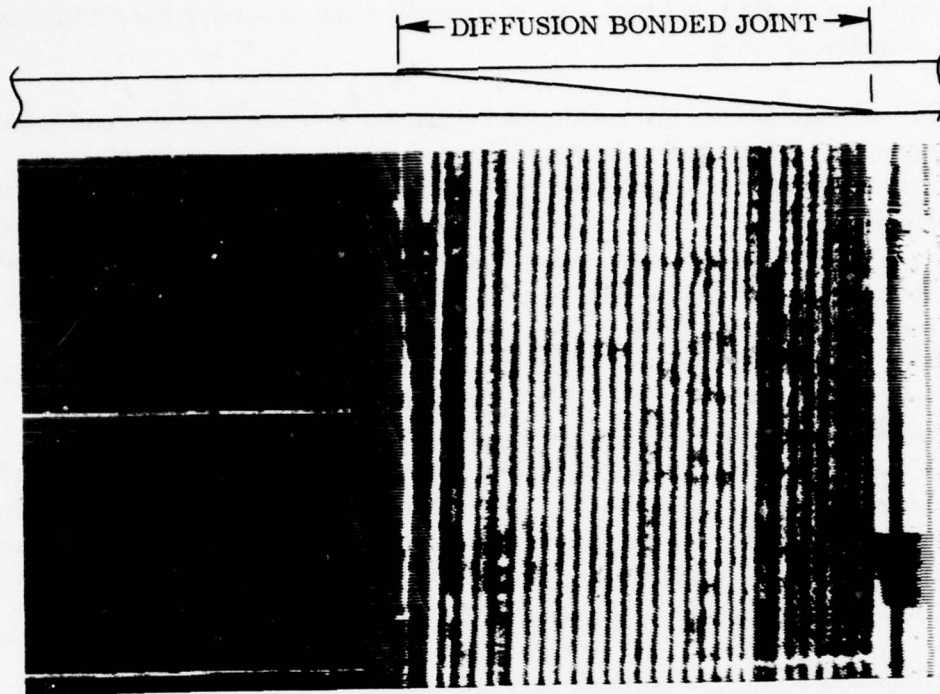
Typical Drag Link Tube/Collar Joint C-Scan
